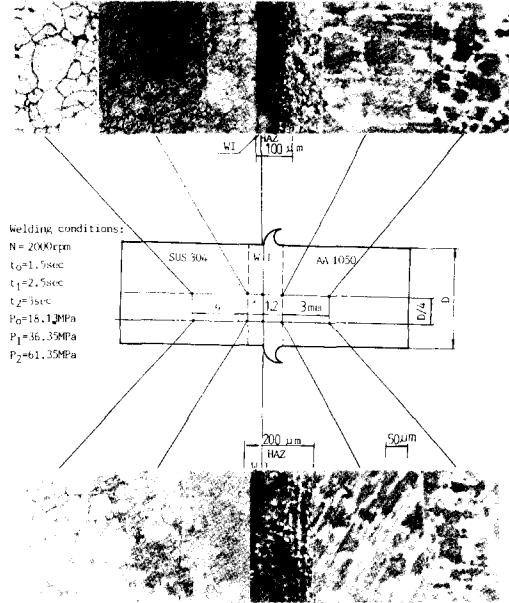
Microstructure at welded zone and base metals of friction welded joints (AA1050-SUS304)
